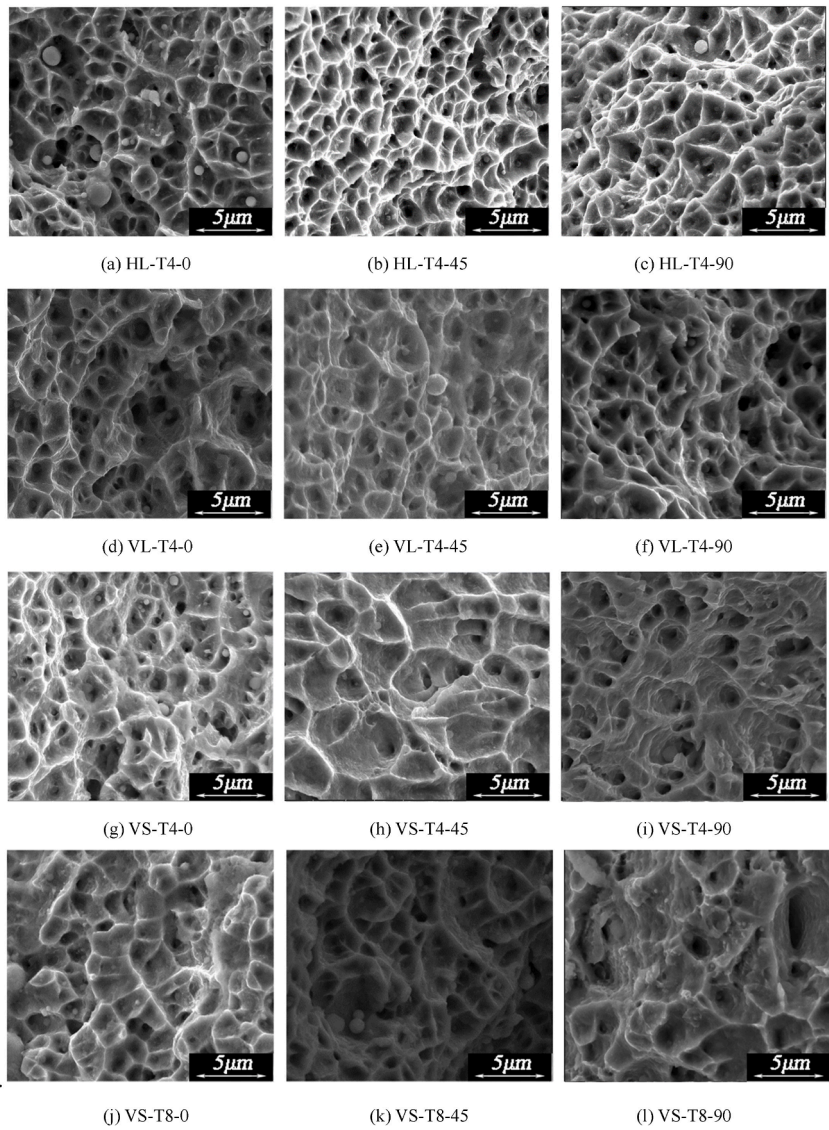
Dimple morphology on fracture surfaces for each group of specimens.
